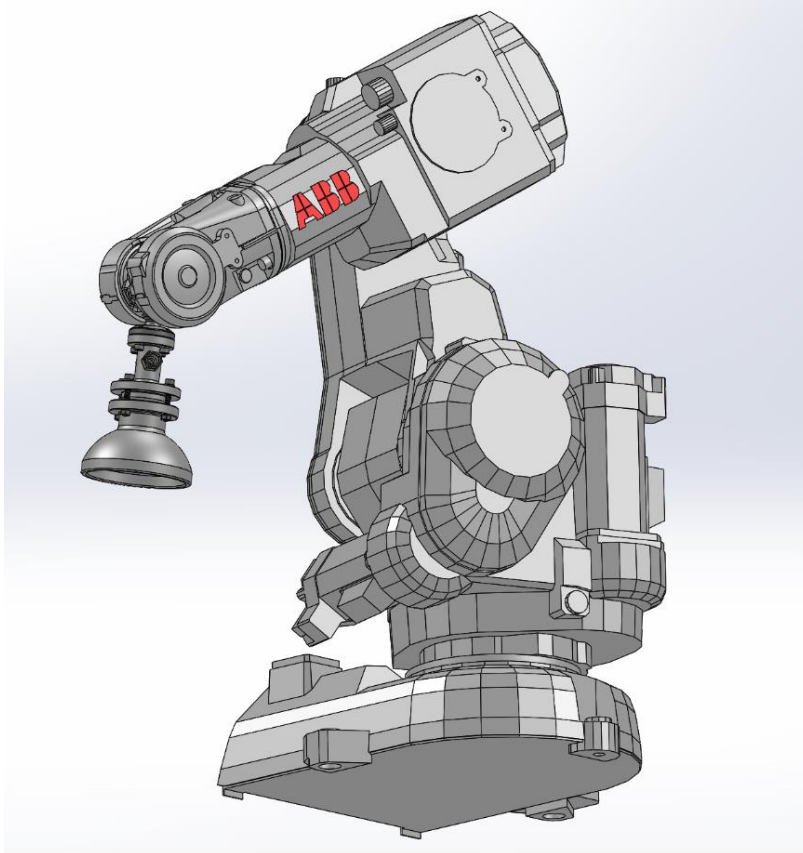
SolidWorks Model of Gripper Mounted to Robot
